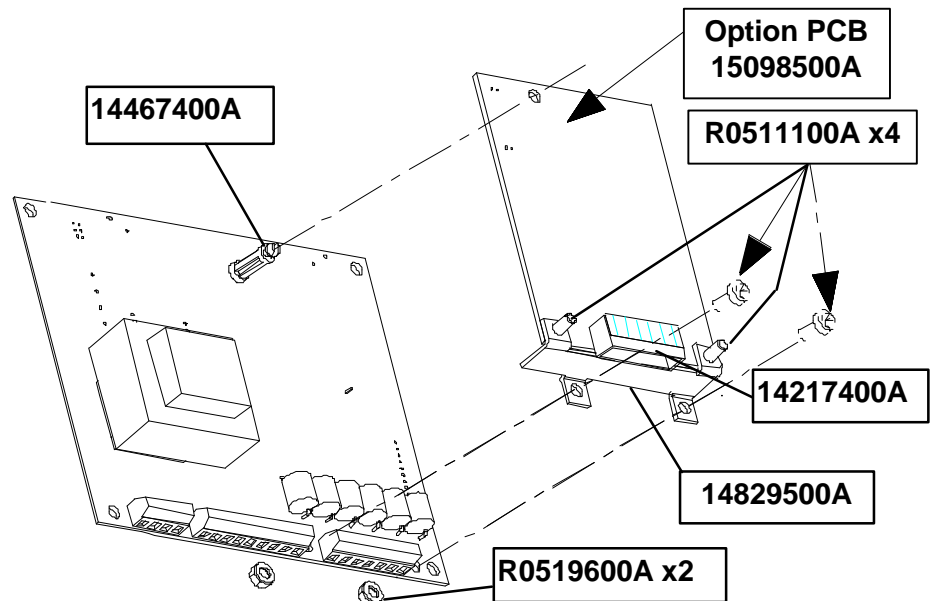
Allen-Bradley PCB Installation in Panel Mount Enclosure
